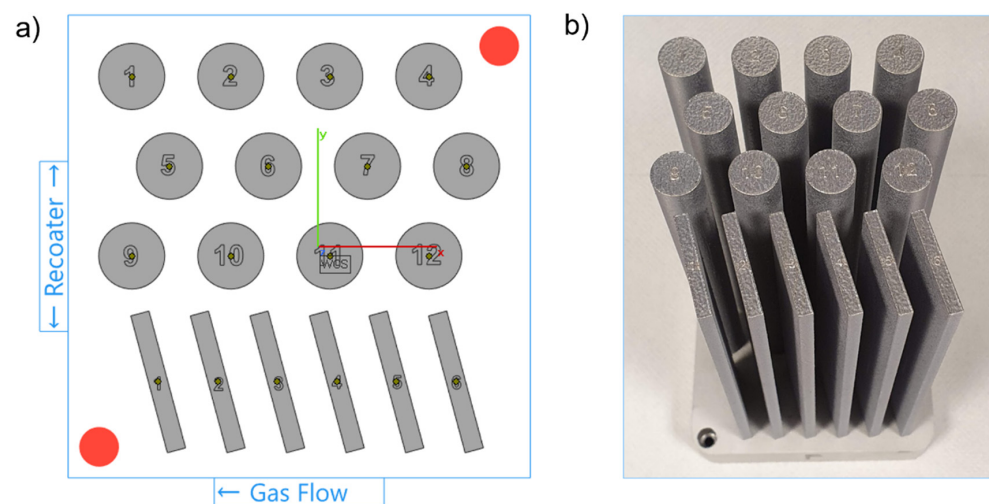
(a) LPBF process build job layout; (b) An exemplar build plate with samples manufactured.
